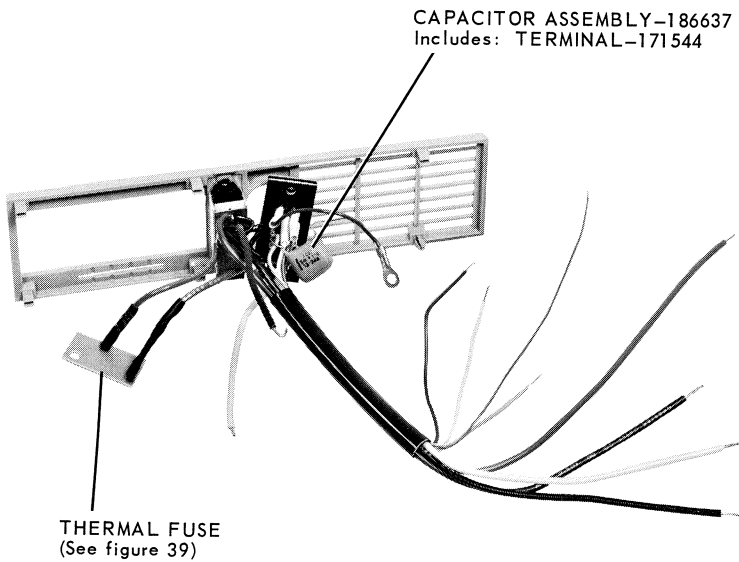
GRILLE ASSEMBLY (760)-187010
